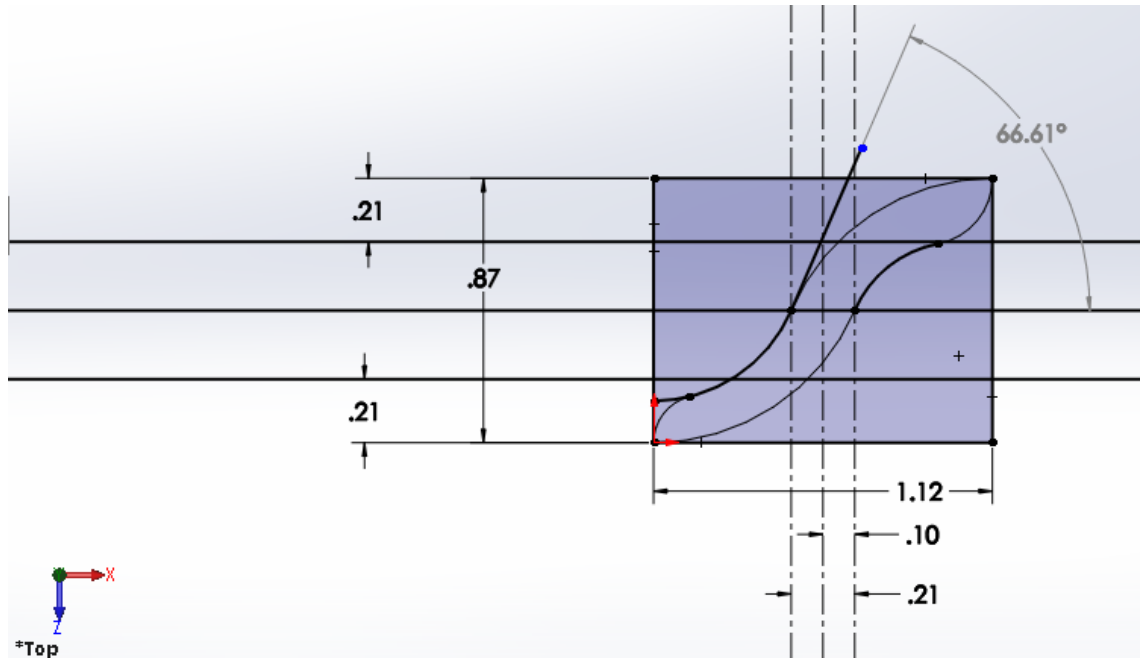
Two-Dimensional Sketch of the S-Shaped Groove (Dimensions in Inches)
